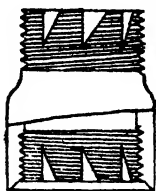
TEMPERED DIE AND TAP FOR MAKING THREAD ON LOST CASING.
